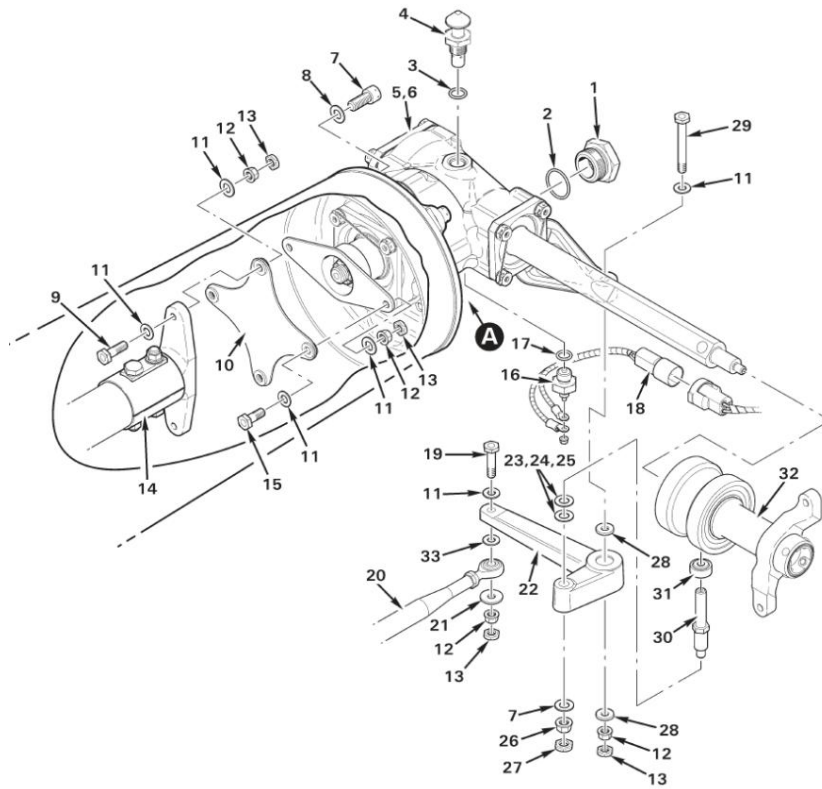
the tail rotor gearbox of a Robinson R44 [25]
